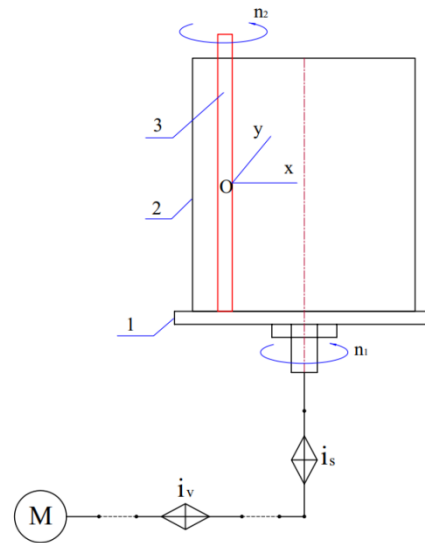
Kinematic diagram of bamboo straw ends grinding machine: (1) Disc-shaped grinding wheel; (2) Straw holder module; (3) Work pieces
